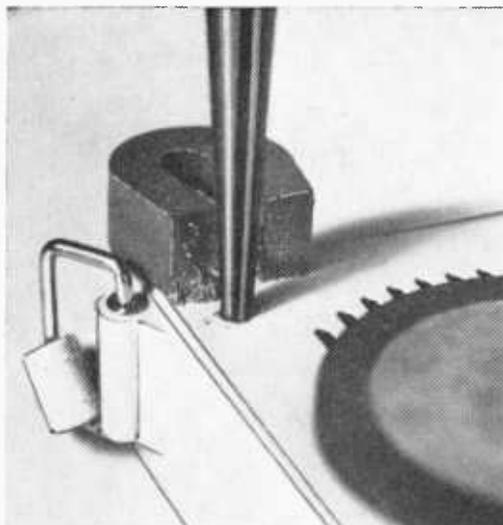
A small magnet, placed near the hole while drilling and reaming, will prevent chips from causing short circuits when the conversion is completed.
